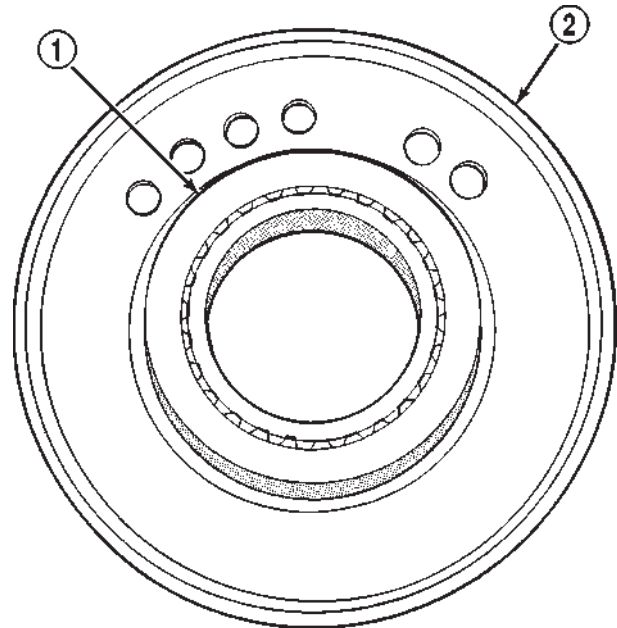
Overrunning Clutch Race Position On Low-Reverse Drum
